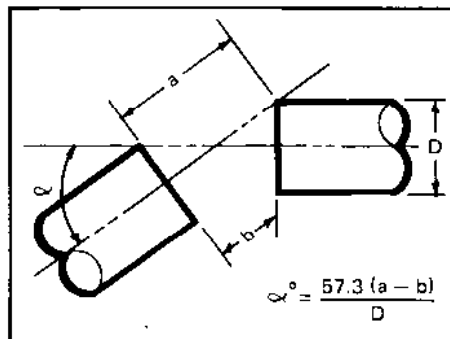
To determine relative angular shaft-positions of driving and driven machines, measure at four points the space between the shaft ends. Choose the largest (a) and smallest dimension (b).
